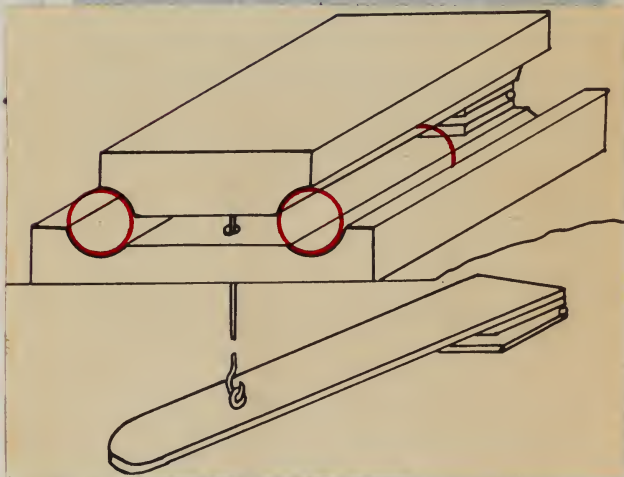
Foot Operated Fixture For Holding Cylindrical Components
